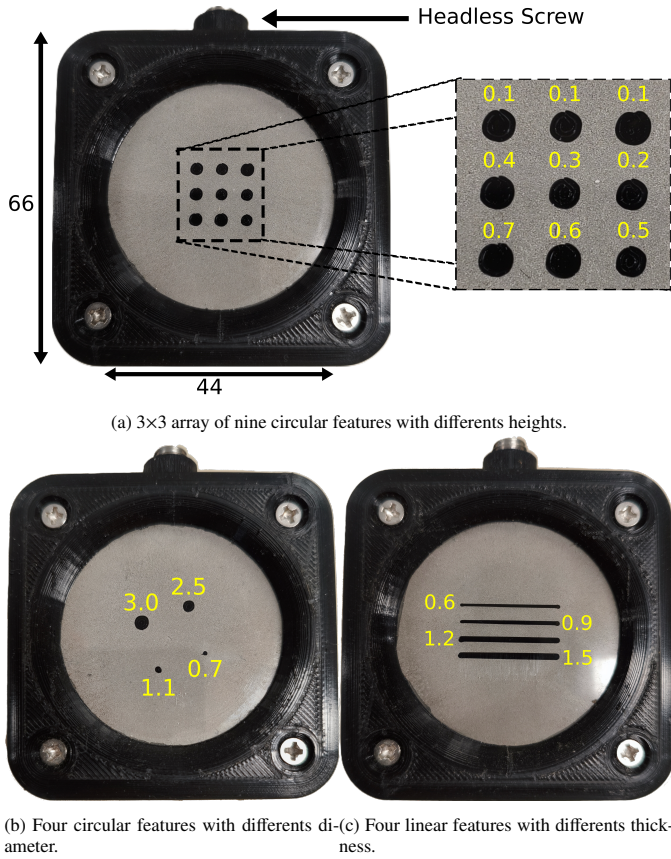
Manufactured samples to simulate a specific flaw in the powder, filled with stainless steel 316 powder. Measures in millimeter.
